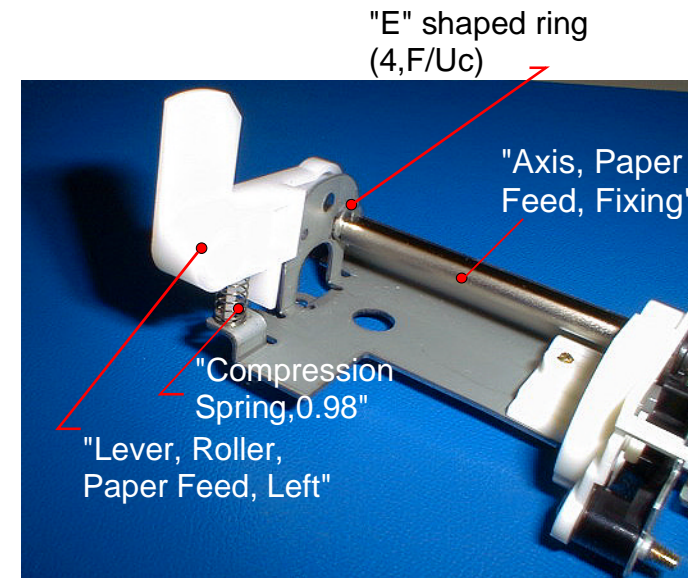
"Axis, Paper Feed, Fixing" Removal
